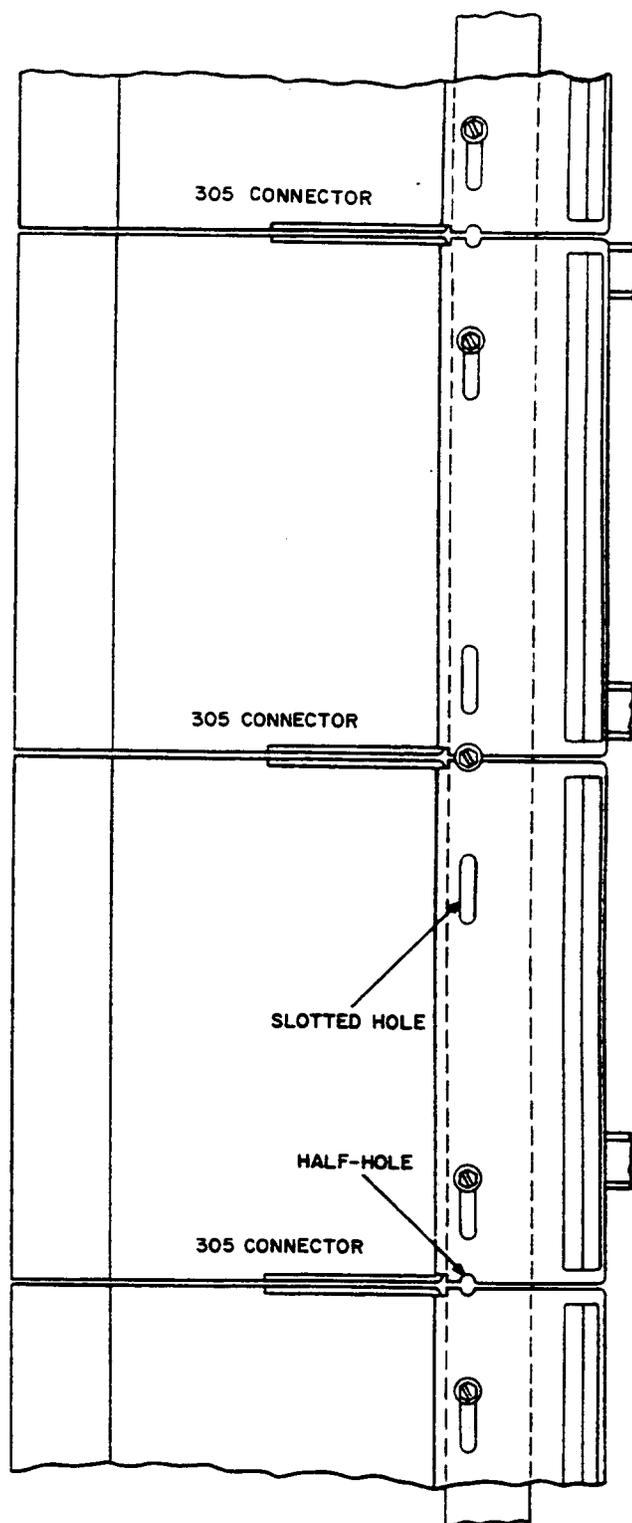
Typical Mounting Arrangement for 305-Type Connectors on a Tall Conventional MDF Using Existing Mounting Holes
